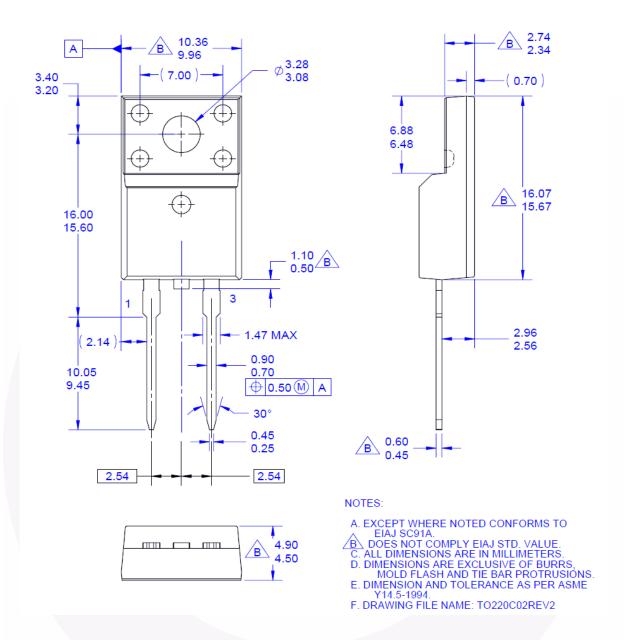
TO-220F 2L - 2LD; TO220; MOLDED; FULL PACK
